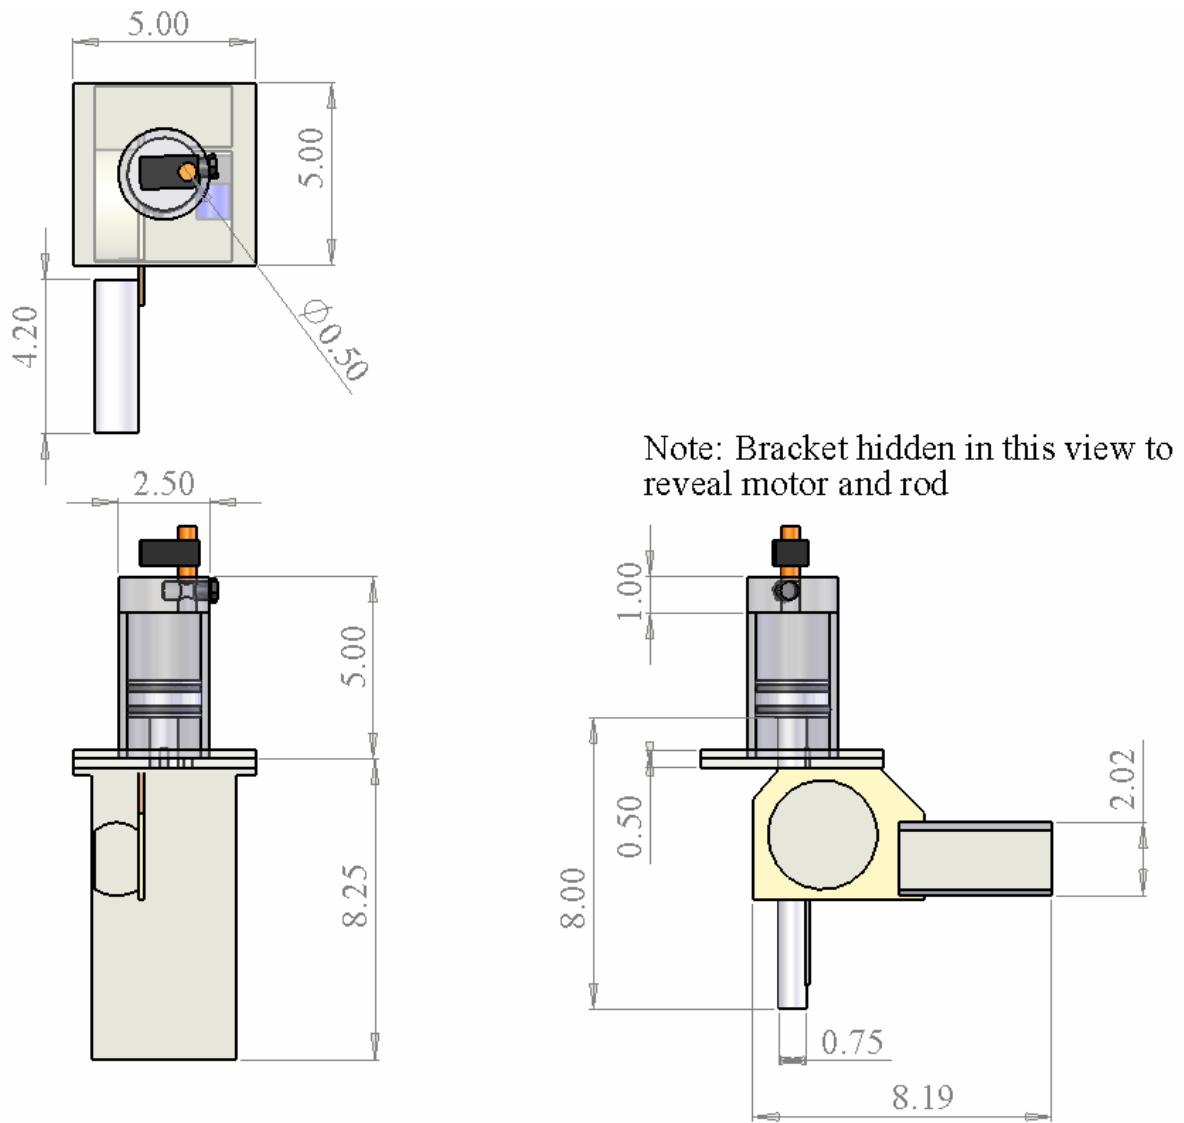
Dimensioned CAD Drawing of Final Recommended ADS Design
